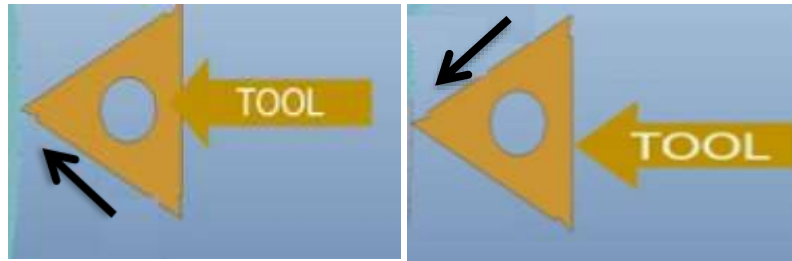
(a) Cutting tool direction is downward, Fig.8 (b) cutting tool direction is up ward
